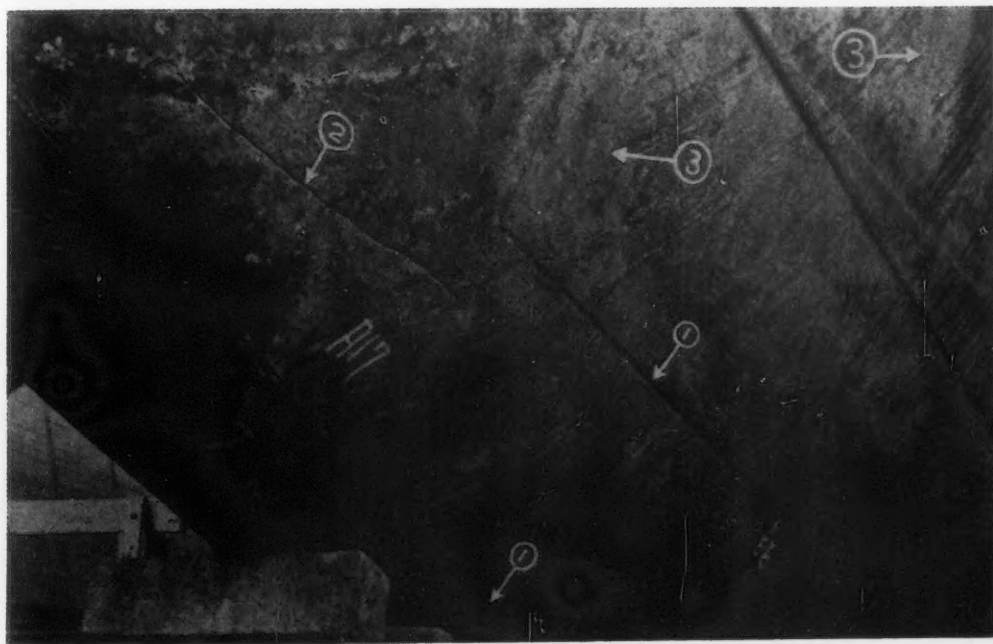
Typical example of weld metal corrosion (arrows 1) caused by mill scale on adjacent plating. Welds were corroded to below the level of the plates and about two thousand feet had to be built up. Note corrosion on plate (arrows 2) and white deposits (arrows 3). This vessel was built abroad and most of the shell plating was of British manufacture.
